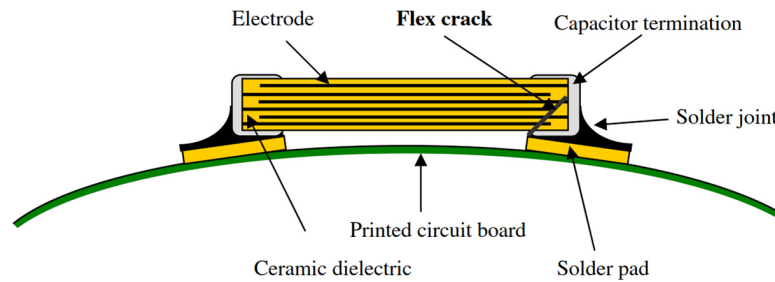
PCB's Electronic components failure due to PCB "warpage"
